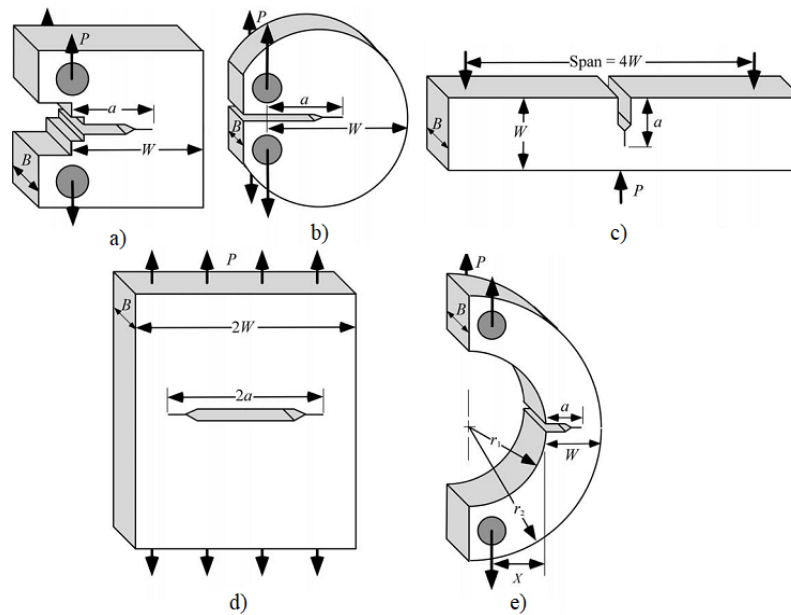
Standardized fracture mechanics test specimens: a) Compact specimen, b) disk shaped compact specimen, c) Single edge notched bend specimen d) Middle tension specimen and e) Arc shaped specimen [28]
